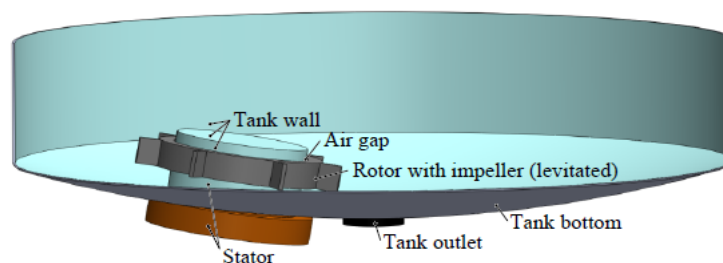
Open view of the tank bottom. The stator is placed inside an indentation reaching into the tank bottom, but still outside of the tank wall. Only the rotor with the impeller blades is then mounted inside the process liquid and is levitated around the stator.
